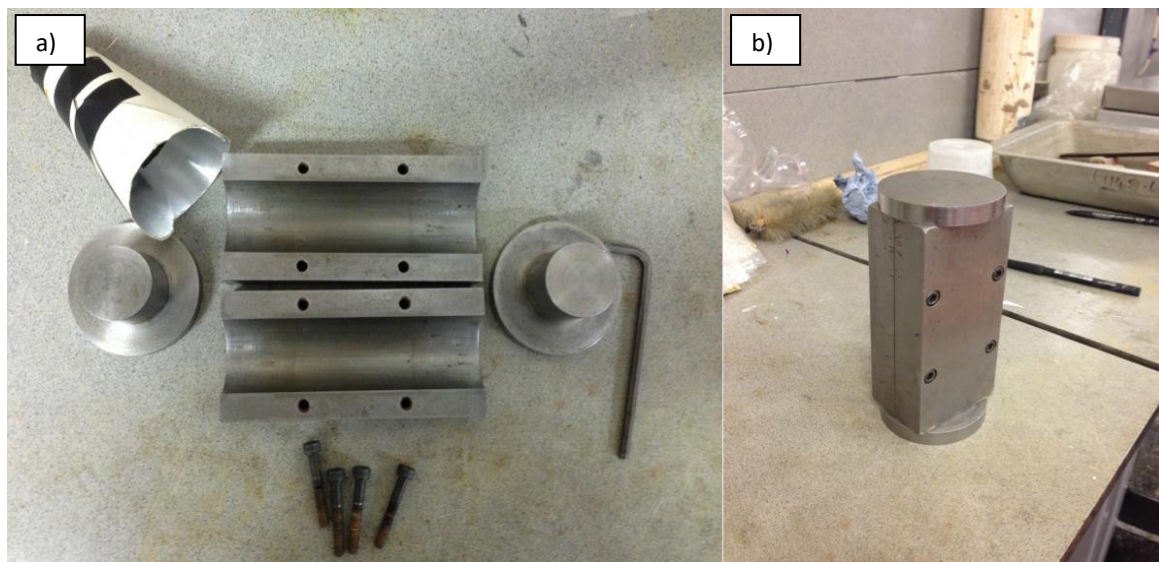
Steel mould with removable ends: (a) disassembled; (b) fully assembled.
